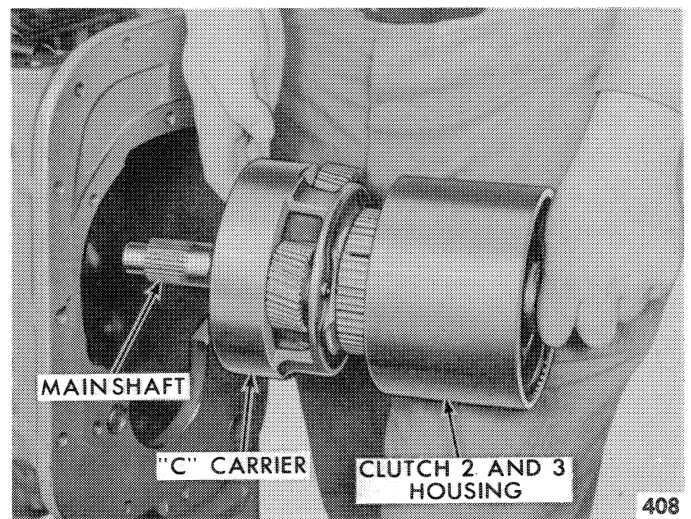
Removing the Mainshaft, "C" Carrier and Clutch 2 and 3 Housing
